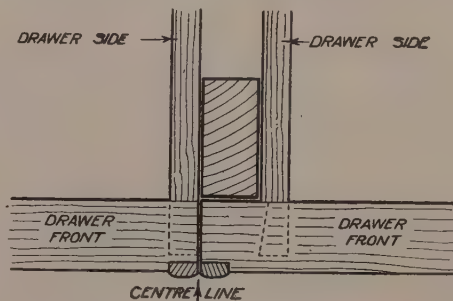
DETAIL OF SIDEBORD DRAWER.
